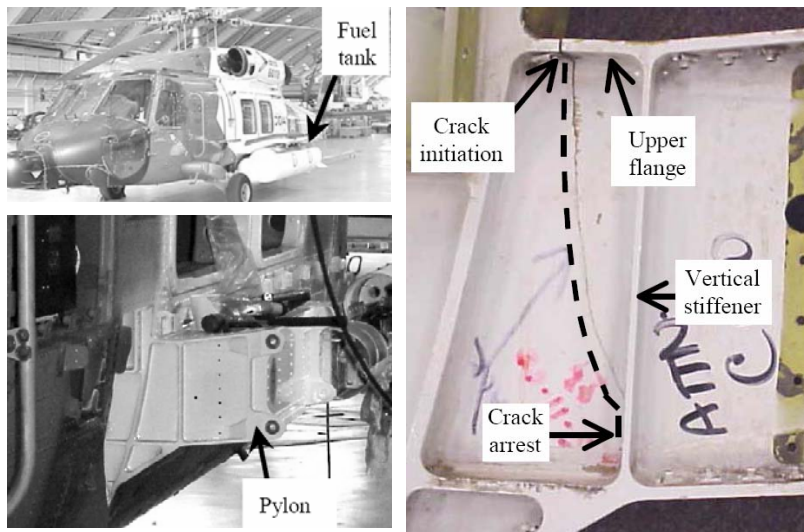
U.S. Coast Guard HH-60J rescue helicopter fuel tank pylon fatigue crack. The crack initiated at a corrosion pit and progressed 8 inches before being discovered (right photo). Material was a 7075 (temper not given) aluminum forging [8].
